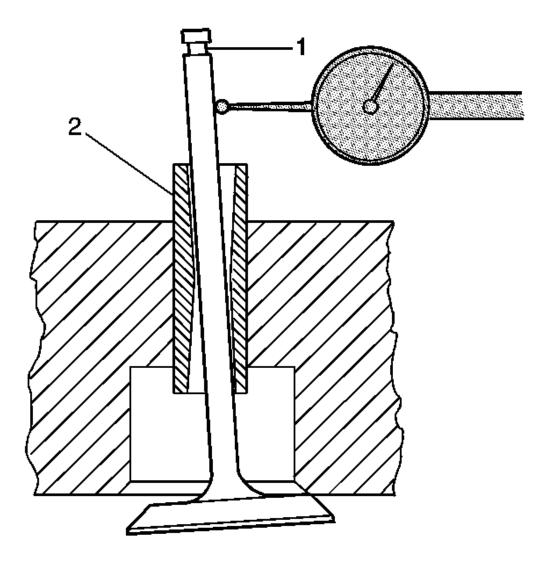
Identifying Valve Guide Excessive Clearance Courtesy of GENERAL MOTORS CORP.
